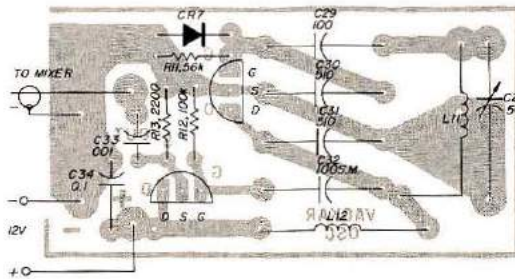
Local-oscillator parts-placement guide, shown from the component side. The FETs are MPF102 — other types may work, but some have different pin connections and would require another board layout.
